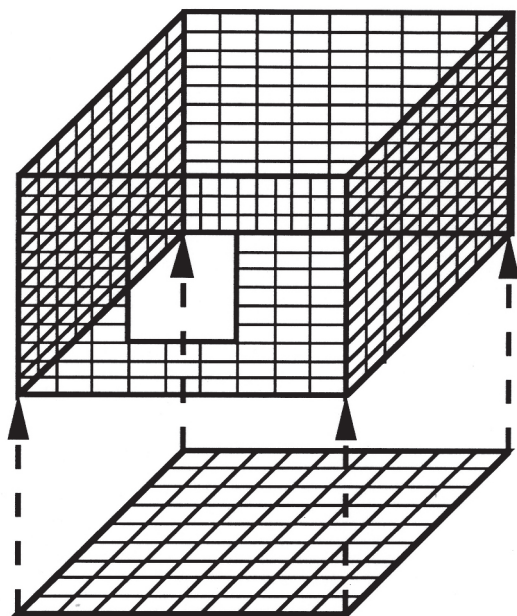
Plan B—Placement of bottom piece to main body of cage.
